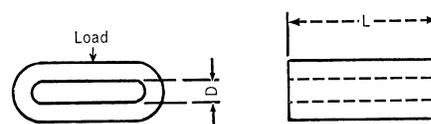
DEFORMED SPECIMEN OF VACUUM BRAKE HOSE
